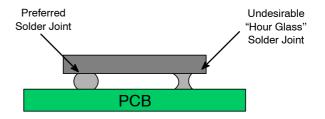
Side View of DFN Illustrating Preferred and Undesirable Solder Joints
